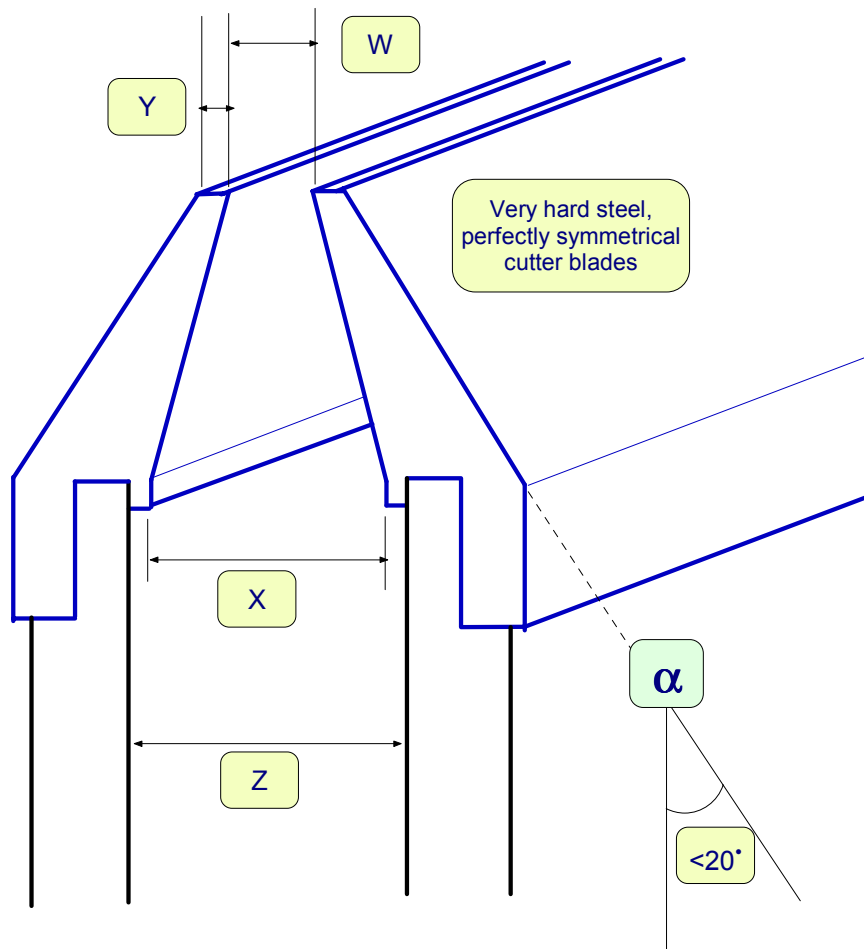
Recommended design for the cutter blades of a straight-path cross-stream sampler.
